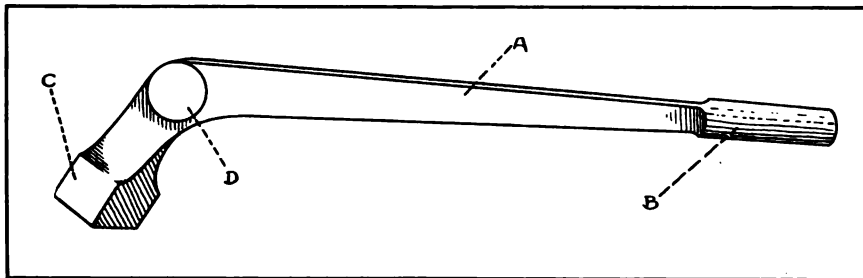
STEPS IN DRAWING OUT THE LEVER
